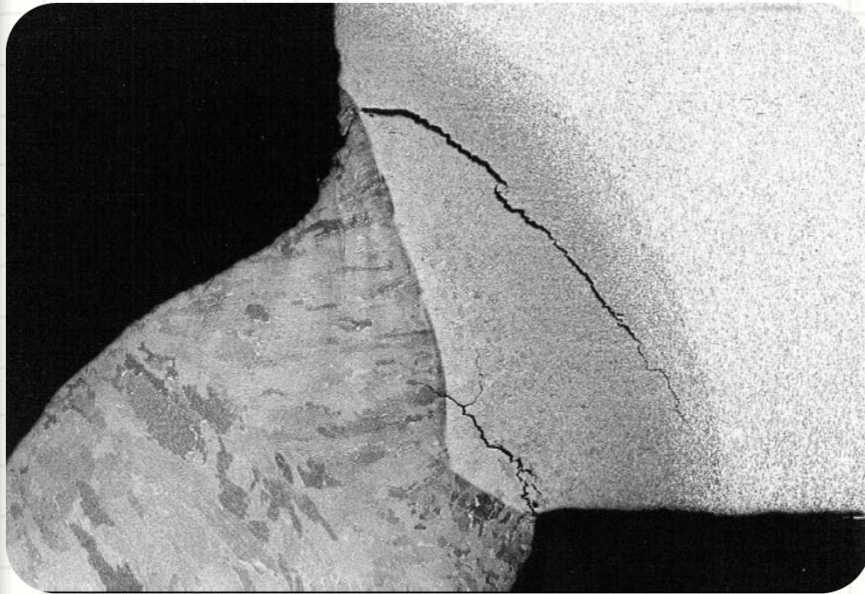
MAG multiple wire welding (a-measurement = 4 mm) at steel. Plate thickness 5 mm, deposition efficiency 14.8 kg/h, welding speed 1.9 m/min.
